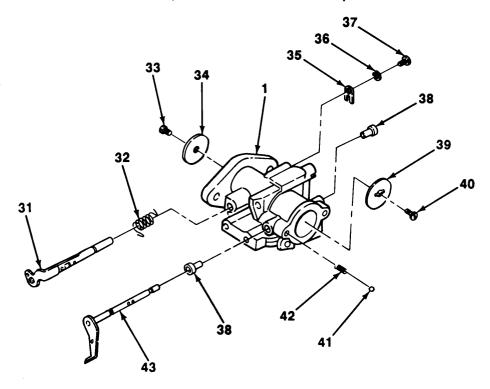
Throttle Shutter, Throttle Lever, Choke Valve, and Choke Lever Replacement.
